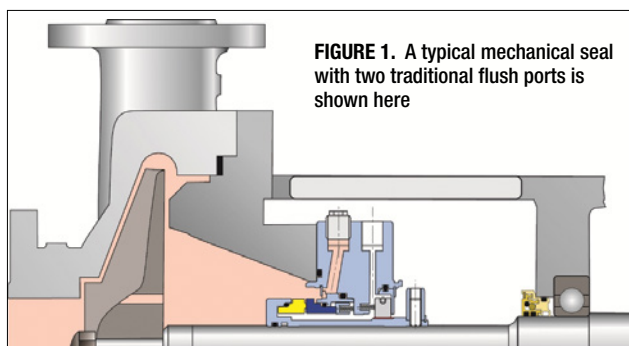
A typical mechanical seal with two traditional flush ports is shown here
